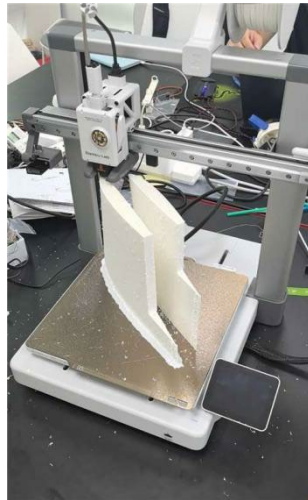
The Right Wing of Prototype 1 being 3D-printed
